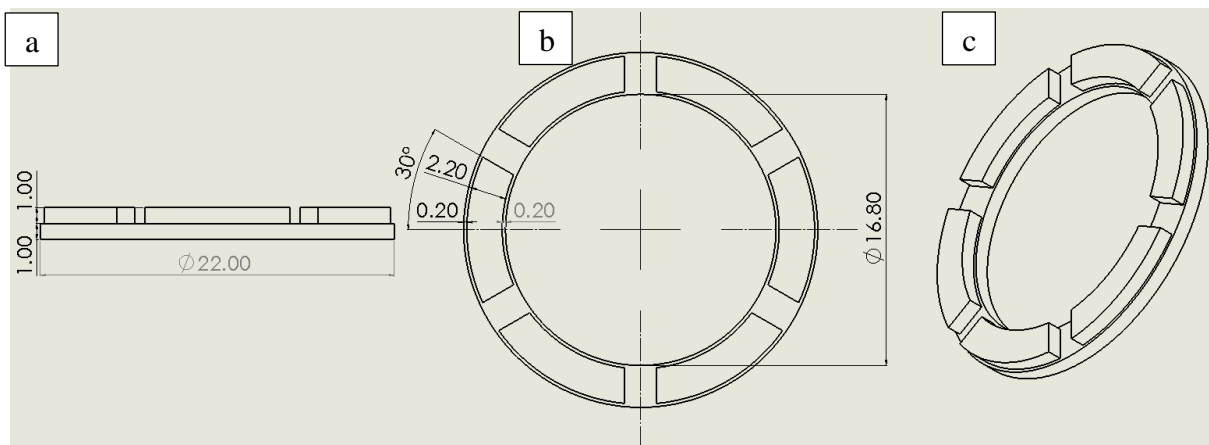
Views of the lid: a) side view b) bottom view c) isometric view
